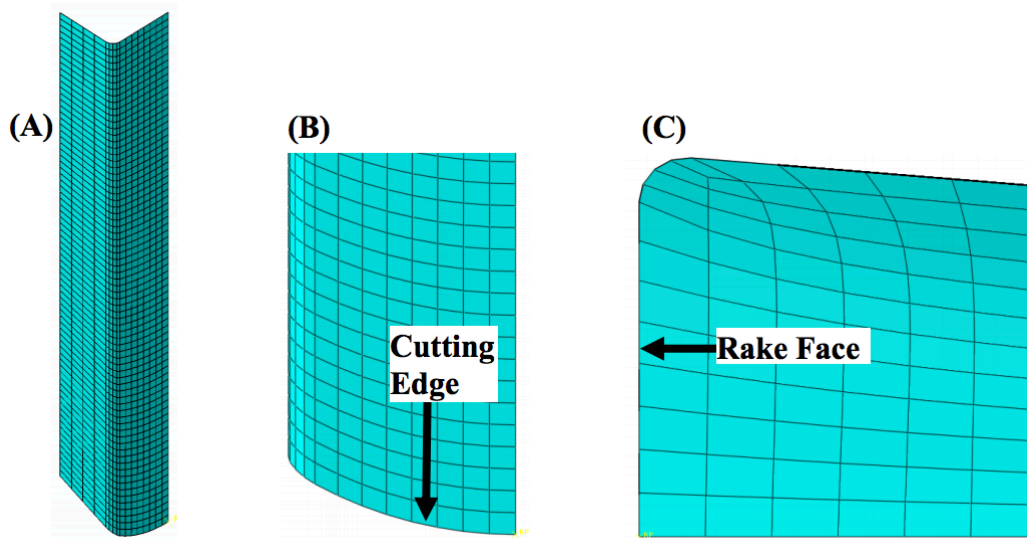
(A) Tool mesh 3D view, (B) rake face view, (C) and top down view [2]
